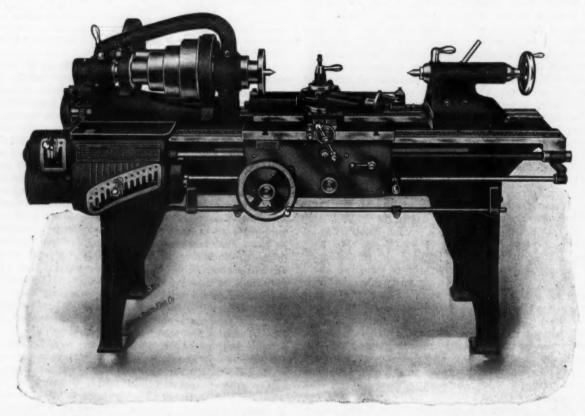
A 16-Inch Lathe with a Tie Bar Head Stock, as Made by the Hendey Machine Company, Torrington, Conn.
